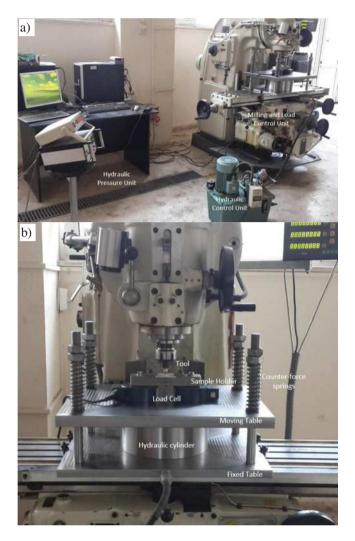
The view of the experimental setup, a) (general), b) (fixing)
